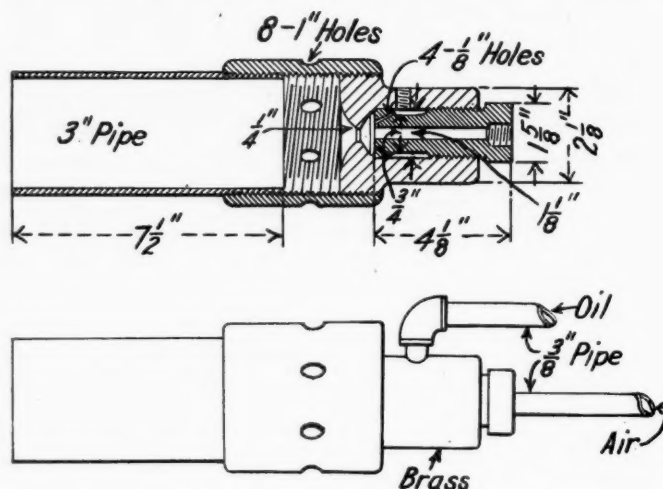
Crude Oil Burner Used for Frame Welding.
